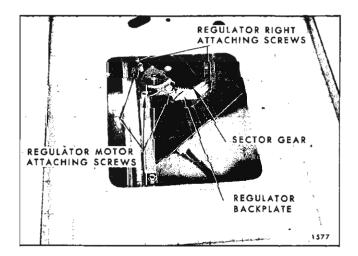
F24—Tail Gate Window Regulator Motor Removal
